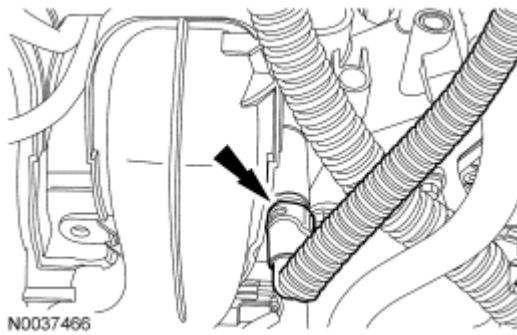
Locating Evaporative Emissions (EVAP) Tube From Intake Manifold
